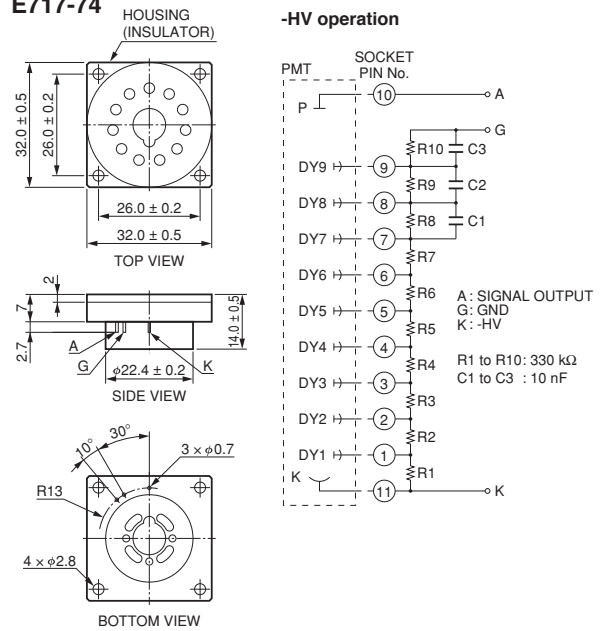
D type socket assembly (Unit: mm) Sold separately
